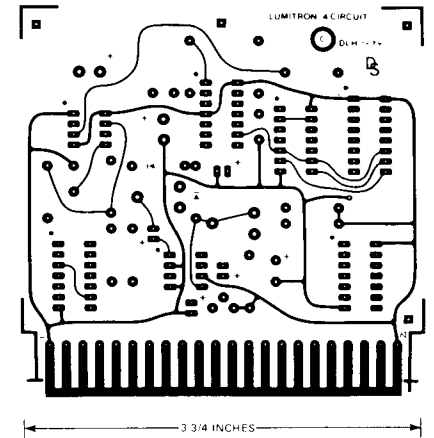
COMPONENT SIDE of control-unit board. If you etch this board yourself, all holes that coincide on both sides will have to be jumpered through. Take special care at IC sockets.
